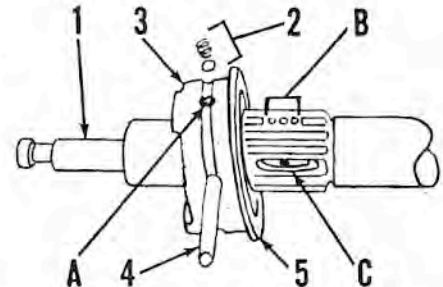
Assembling shift mechanism to propeller shaft. Refer to text.
